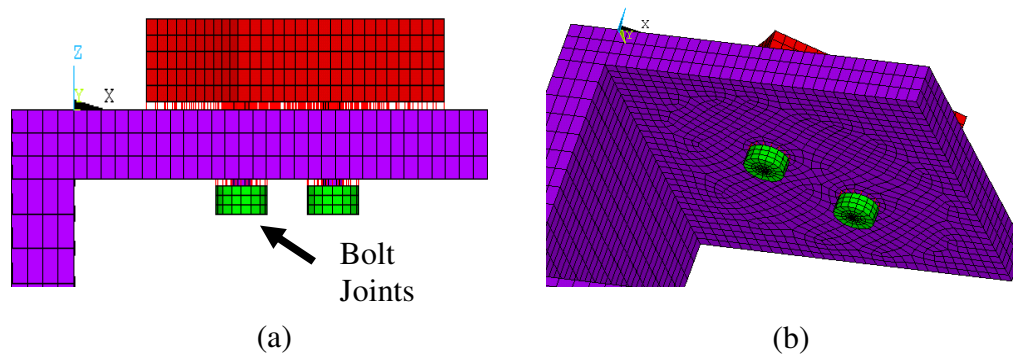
Winding support bolt joint: (a) side view, (b) bottom view
